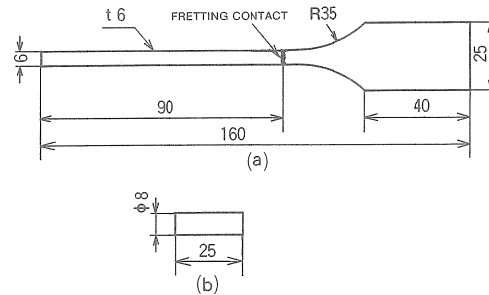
Details of the fatigue specimen (a) and fretting pad (b).
